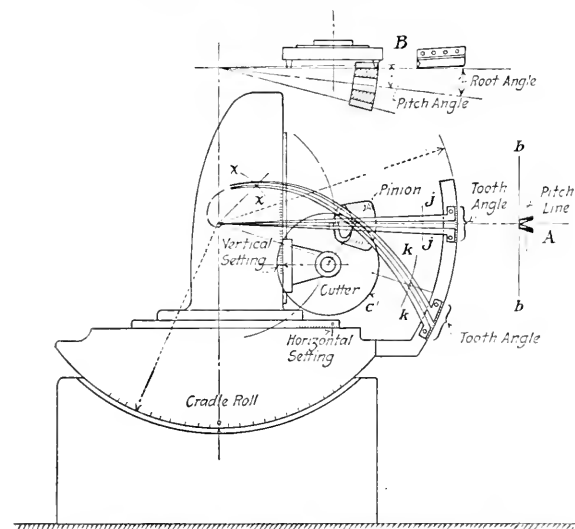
THE GLEASON CRADLE-ROLL GENERATOR AS APPLIED TO THE PRODUCTION OF STRAIGHT-TOOTH AND SPIRAL BEVEL GEARS
